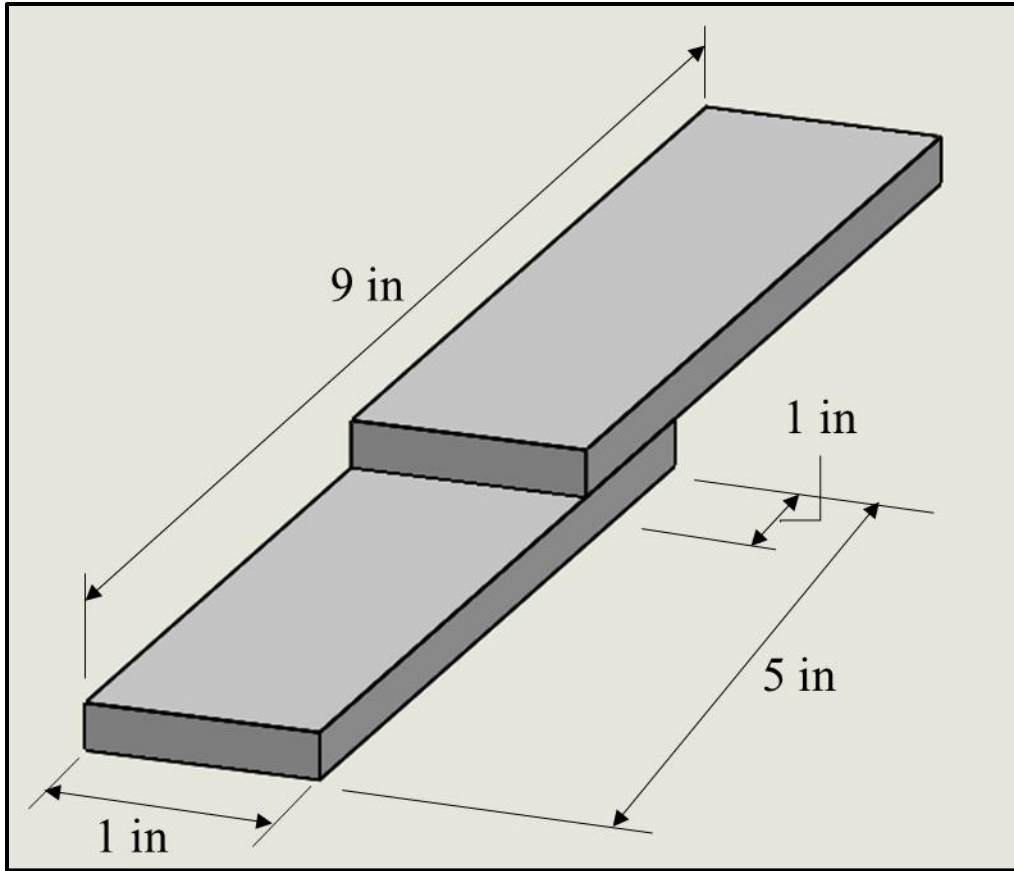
Secondary Bonding Lap Shear Specimen Rendering
